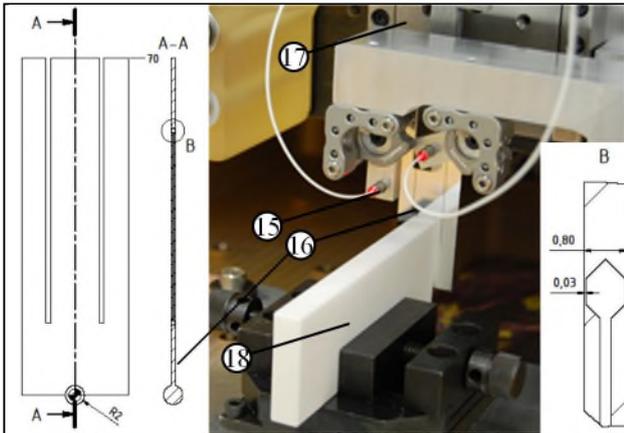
Tactile sensor probing a gauge block (18), mounted on a Z-stage (17), based on a silicon flexure with aluminium coating (16) whose deflection is measured with fibre interferometers (15).
